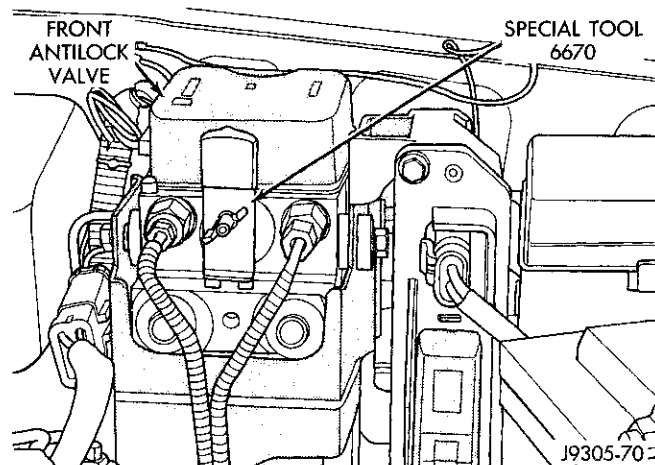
Front Antilock Valve Bleed Valve Stem & Plug
